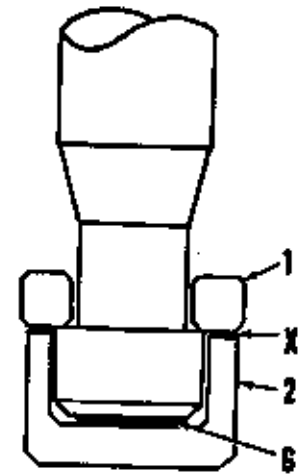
Feeler stock method of checking end clearance between rotator cap and end of valve stem.
